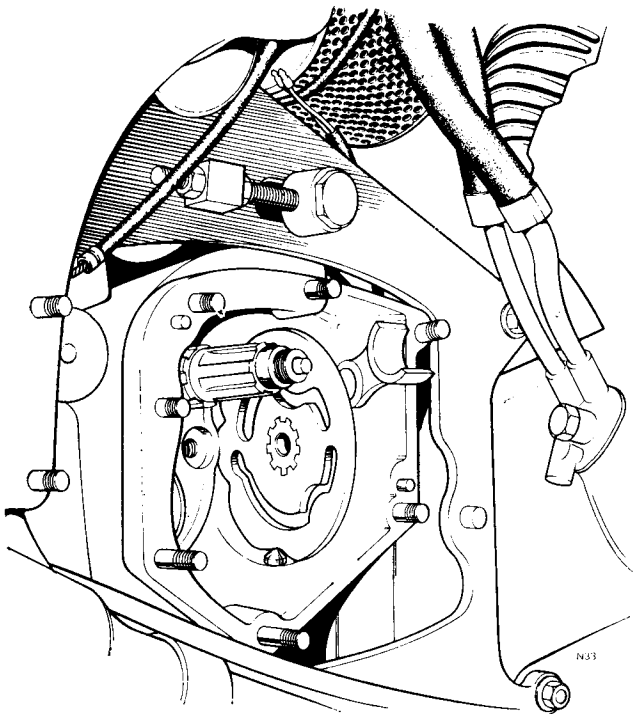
Location of camplate to index plunger. Knuckle end of quadrant is aligned to top front cover stud
